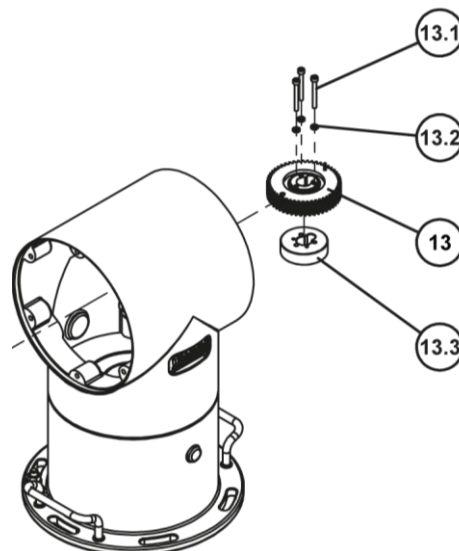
Exploded view of Pan/Tilt unit with Scissor gear pan
